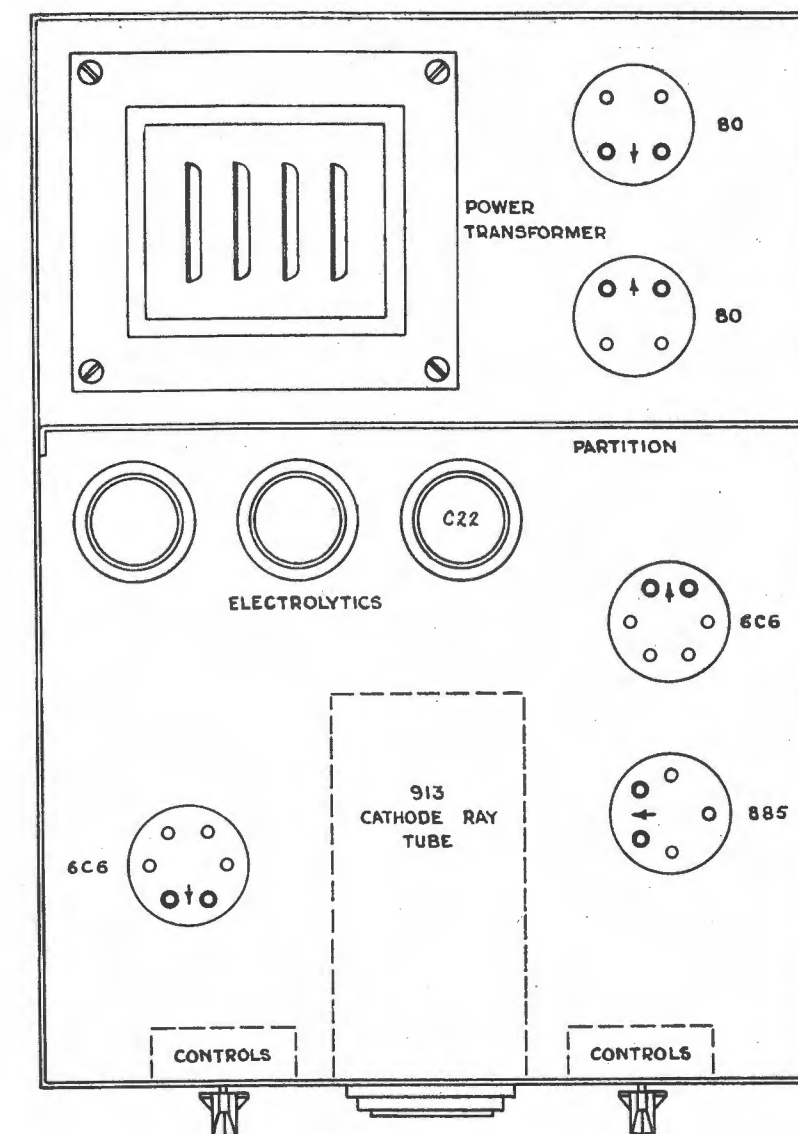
Suggested chassis layout for the 913 oscillograph. The drawing is made to ½ in. = 1 in. scale.
